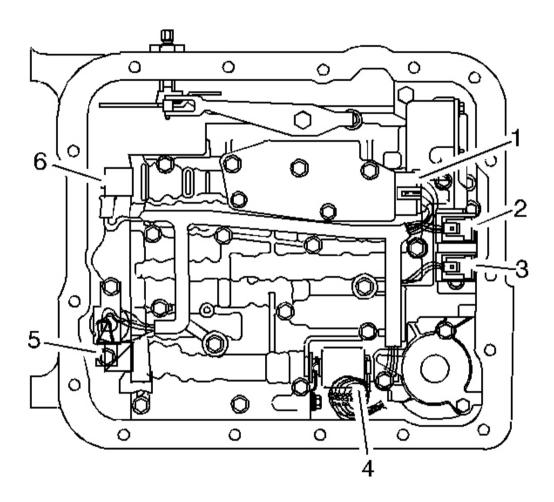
Identifying Valve Body Electrical Connections Courtesy of GENERAL MOTORS CORP.
